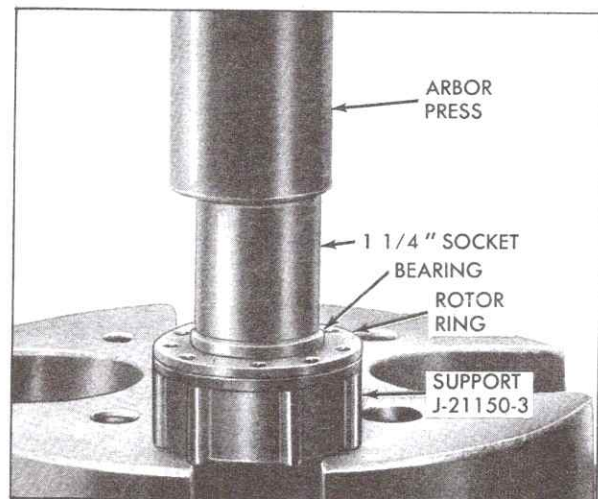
Installing Rear Bearing in Rotor Ring
